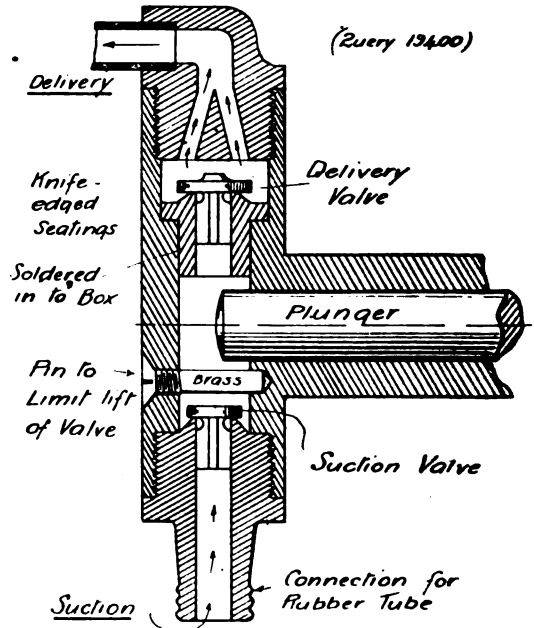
SECTION OF VALVE CHAMBER SHOWING VALVE SEATING.
